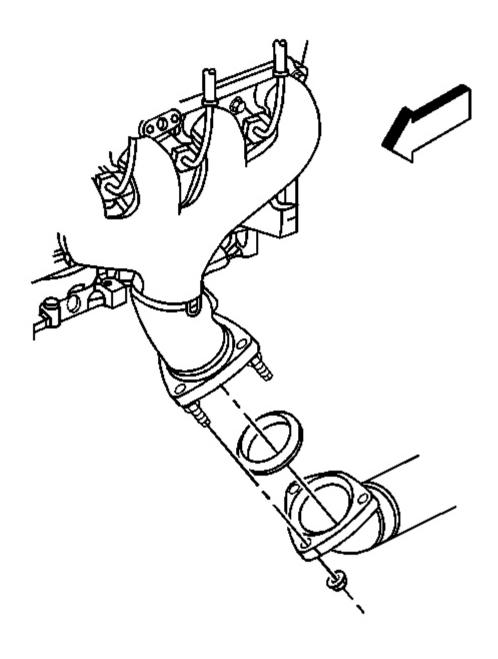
Exhaust Manifold & Nuts Courtesy of GENERAL MOTORS CORP.
